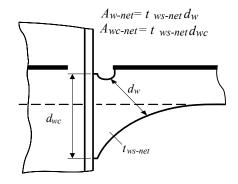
Primary Support Member Web Stiffener Details
